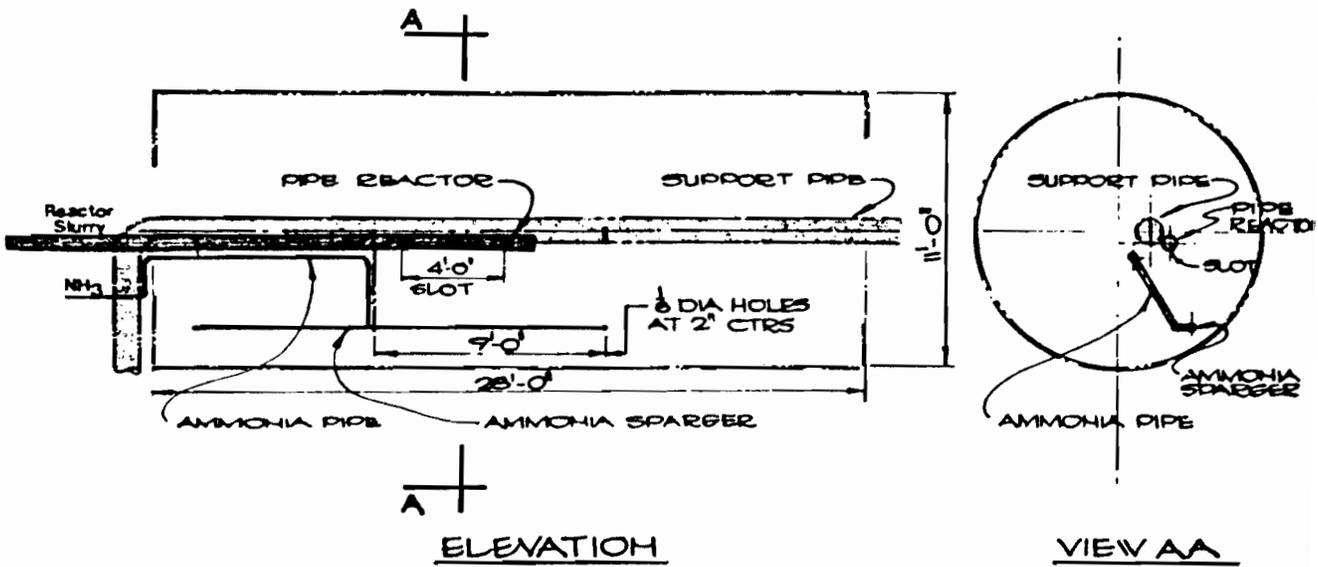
SPARGER & REACTOR LAYOUT INSIDE DRUM
